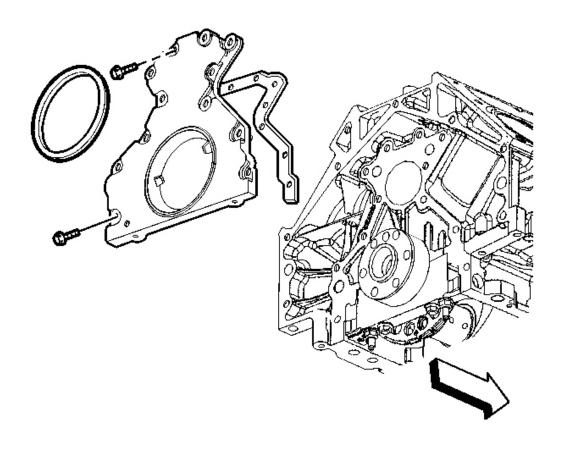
View Of Rear Cover, Bolts & Gasket Courtesy of GENERAL MOTORS CORP.
